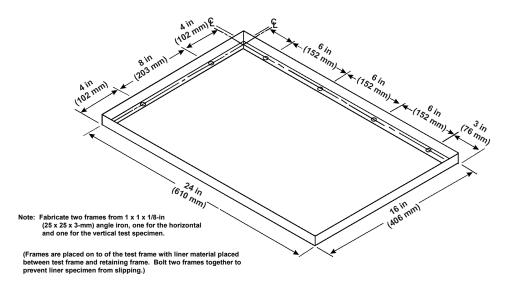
Cargo Liner Test Specimen Retaining Frame
